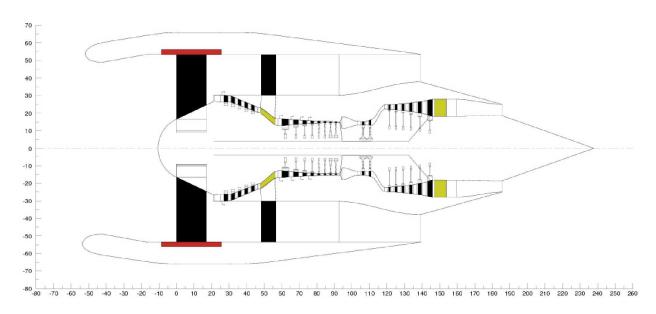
FPR1.6 podded engine internal layout (dimensions in inches).
